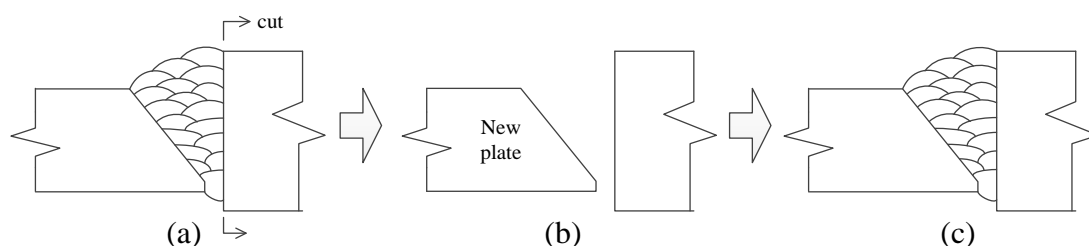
The sequence of repair weld of full penetration butt welds. (a) 30 mm and 50 mm plates welded together with single bevel butt weld. (b) Filler metal was cut off along with the 30 mm plate and new 30 mm plate placed and (c) plates re-welded together (first repair weld).
